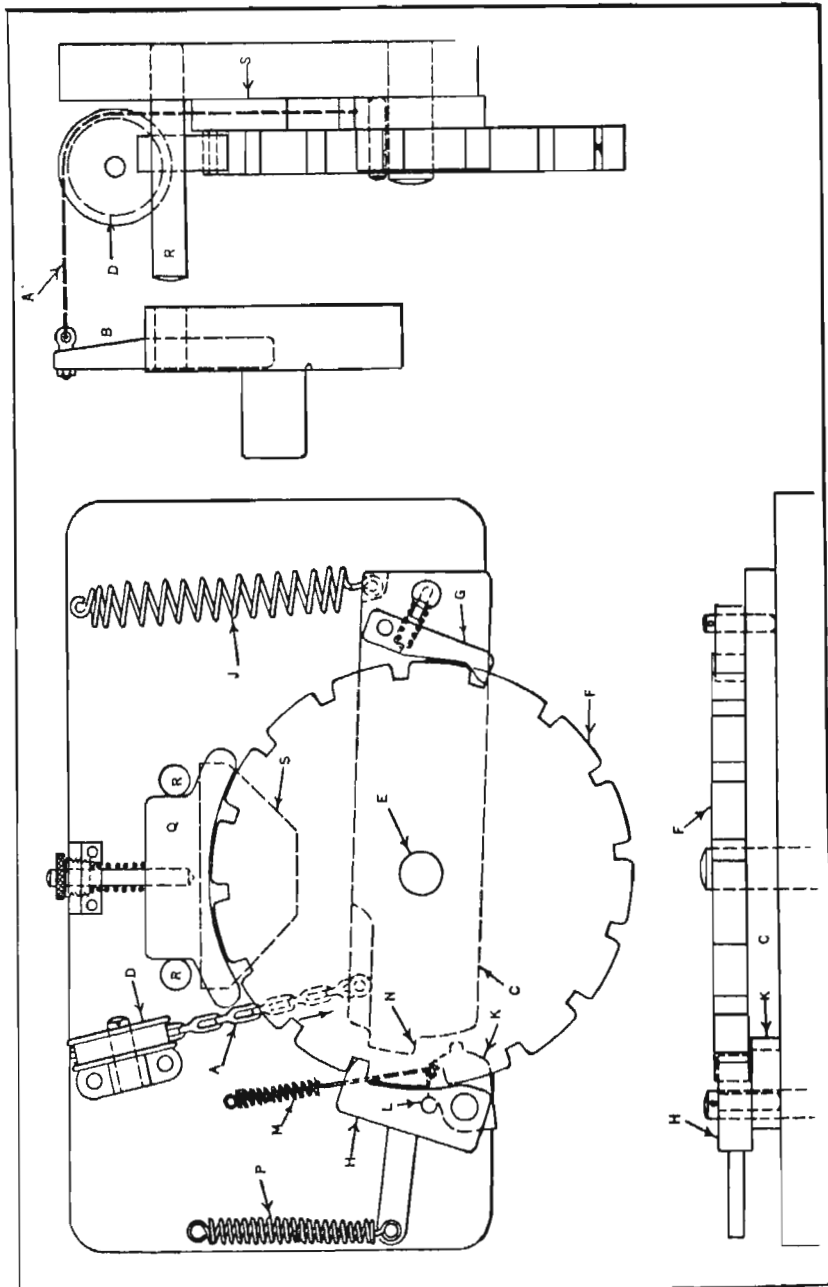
Automatic Dial Feed for Press Work, Which is Self-contained and Readily Placed on or Removed from the Press
